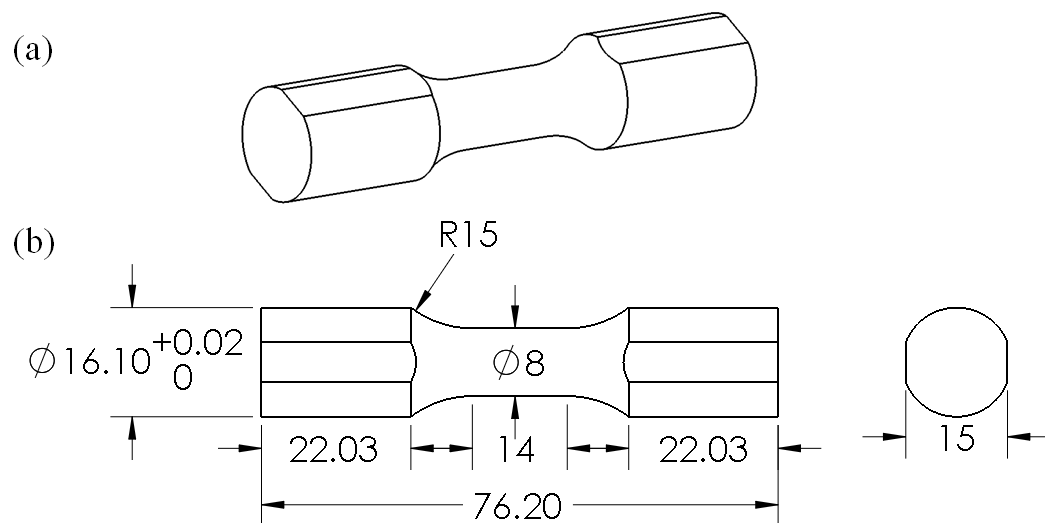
Schematics of specimen for monotonic tension and cyclic loading experiments with dimensions: (a) Schematic illustration and (b) engineering drawing with dimensions.
